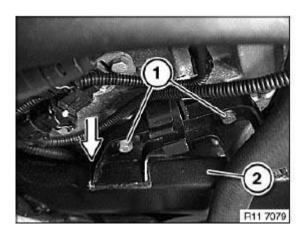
Identifying Air Duct With Screw Courtesy of BMW OF NORTH AMERICA, INC.
